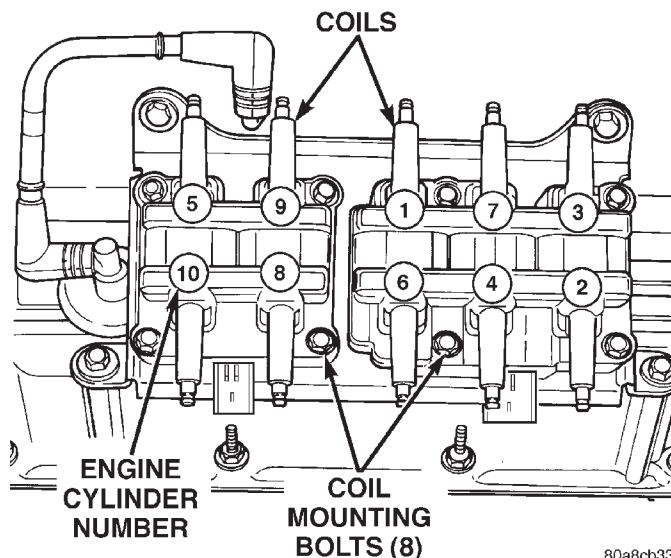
Ignition Coil Packs—8.0L V-10 Engine
